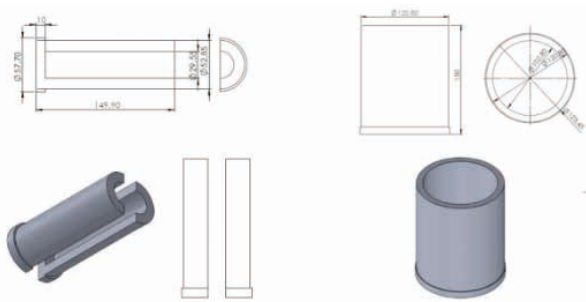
Design drawings of the bipartite solidification mold and crucible.
